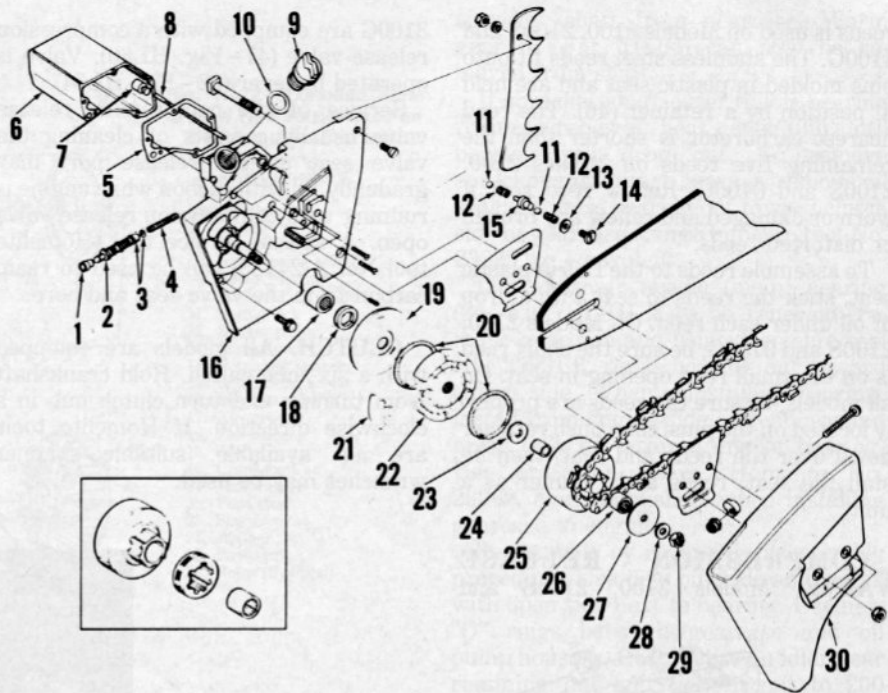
Exploded view of direct drive clutch and related parts used on C-72 models. C-52 models will be similar. Inset shows the other available splined type sprocket and drum.
